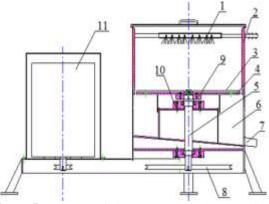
Diagram of pig stomach washing machine 1: water spray; 2: Standing bar; 3: bar horizontal; 4: washing dishes;5: shaft; 6: dirty containers; 7: The drain pipe is dirty; 8: belt drive;9: Flanges; 10: Bearing; 11: Engine.
